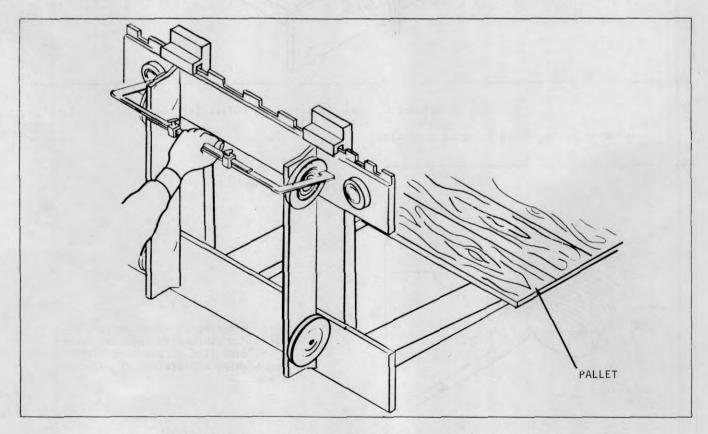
Spanning Upper Rollers (Four Roller Carriage)
